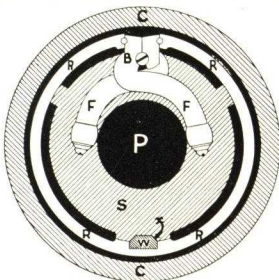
Ring Unexpanded and Disengaged from Friction Contact with Casing
